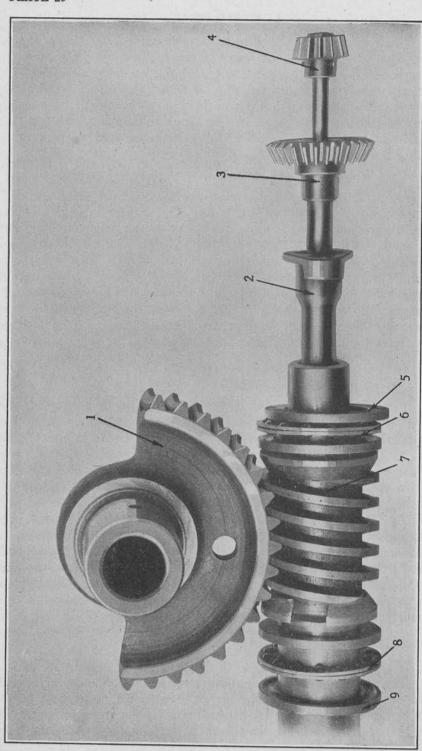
STEERING GEARS, WORM AND SECTOR	Ref. No. Part No. Name 1 023 GEC Bearing stem segment. 2 30534 GA Hand control stationary tube	3 00300½ GA Carbureter hand control bevel	4 00303½ GA Magneto control bevel pinion. 5 023½ GAC Steering stem thrust washer. 6 023½ GAB Steering stem thrust ball bear-	7 025 GE Steering stem worm. 8 023¼ GAB Steering stem thrust ball bear-	9 023 % GAB Steering stem thrust washer.
